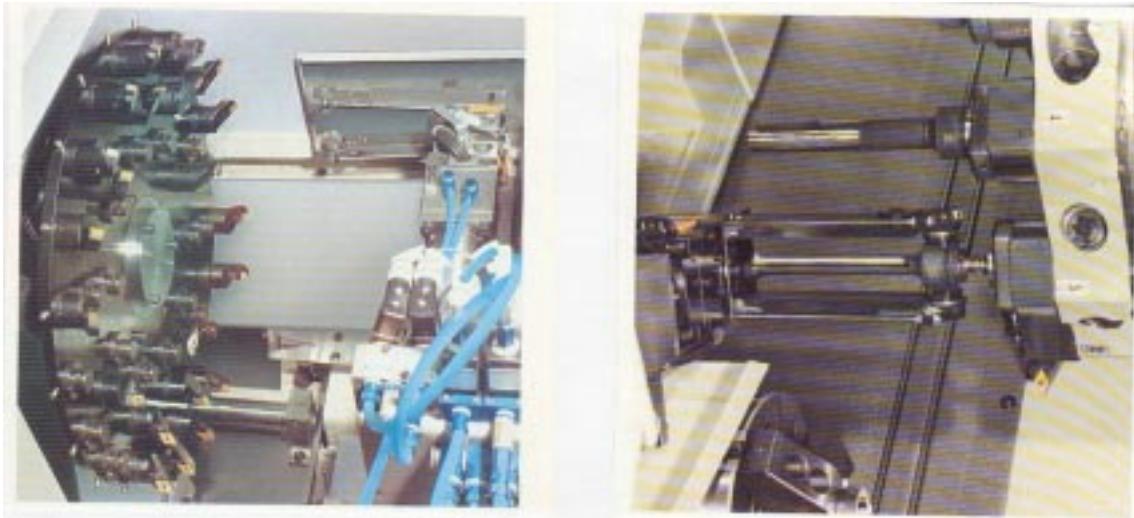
Disc type tool magazine used in CNC turning centres with modular tooling along with a tool change arm (Courtesy Boehringer, Germany).
